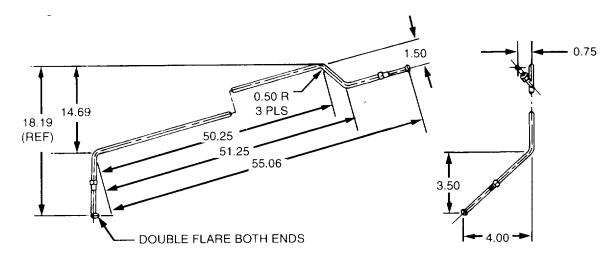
Hydraulic Brake Tube Assembly, Front (M101A3, M116A2E1, and M116A3)
